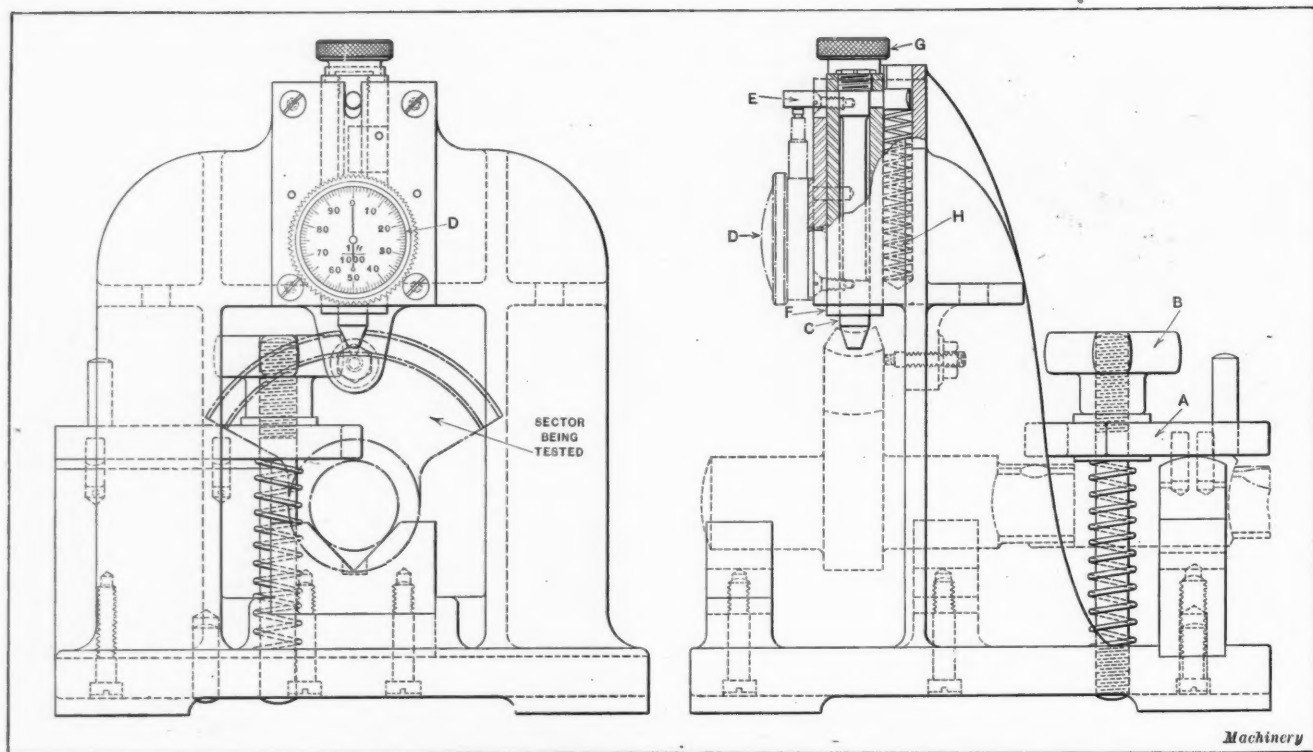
Fixture for testing Eccentricity of Steering Gear Sector
